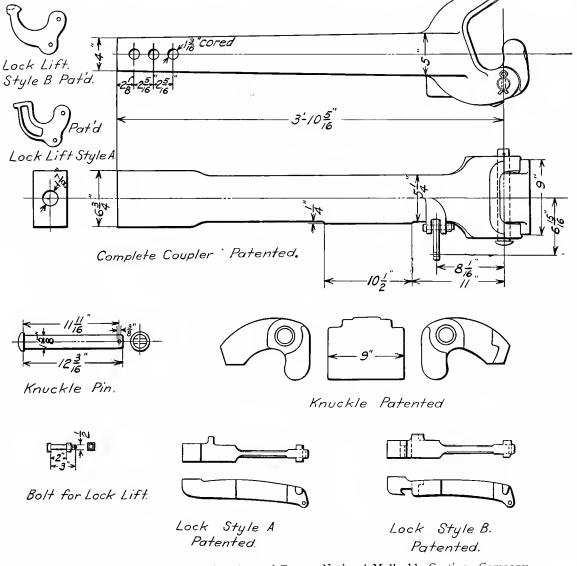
Chicago Passenger Coupler and Parts. National Malleable Castings Company.
